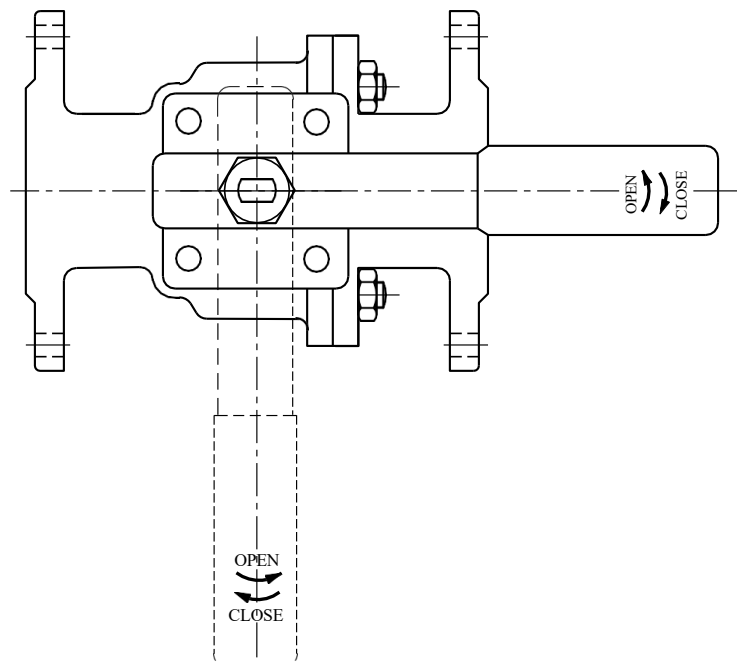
HAND LEVER OPEN-CLOSE DIRECTION MARKING
